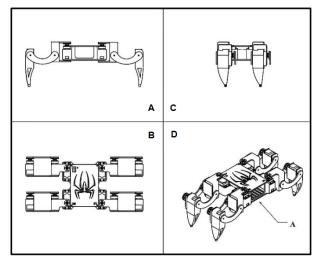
Quadruped Robot 2 Mechanical Design (Servo MG996R): Front View (A), Top View (B), Left View (C), Isometric (D)
